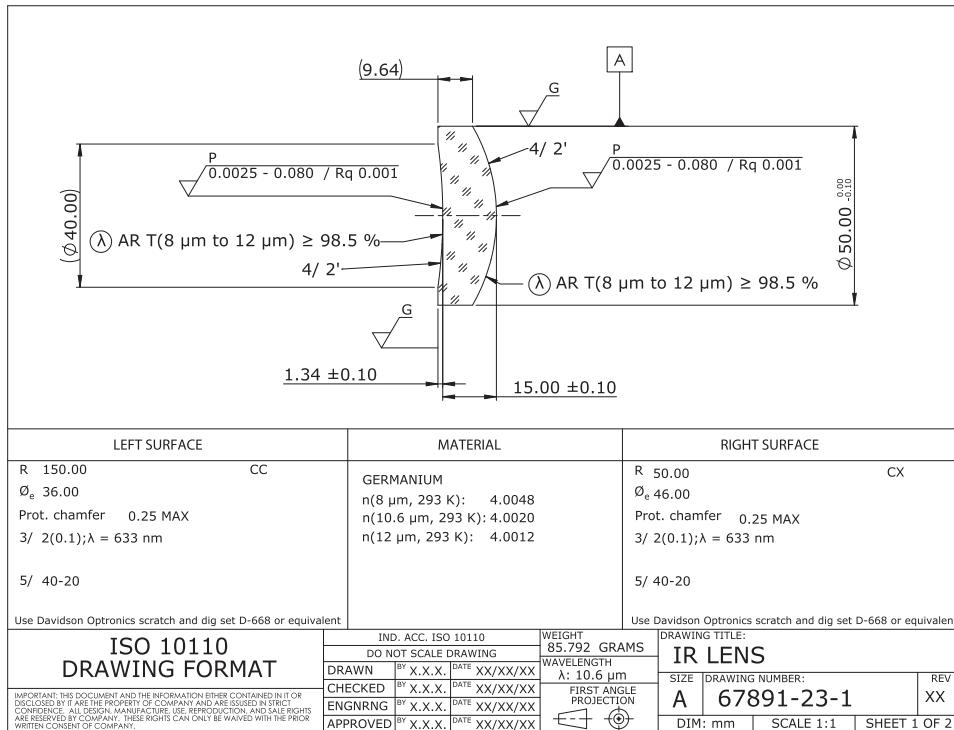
ISO 10110 drawing with datum explicitly defined in the drawing field.
